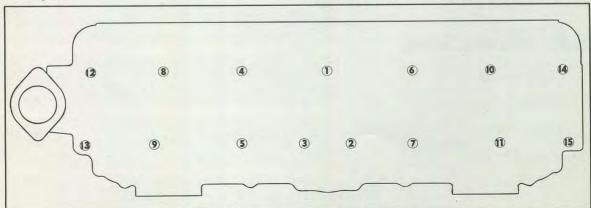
Cylinder Head Torque Tightening Sequence.
